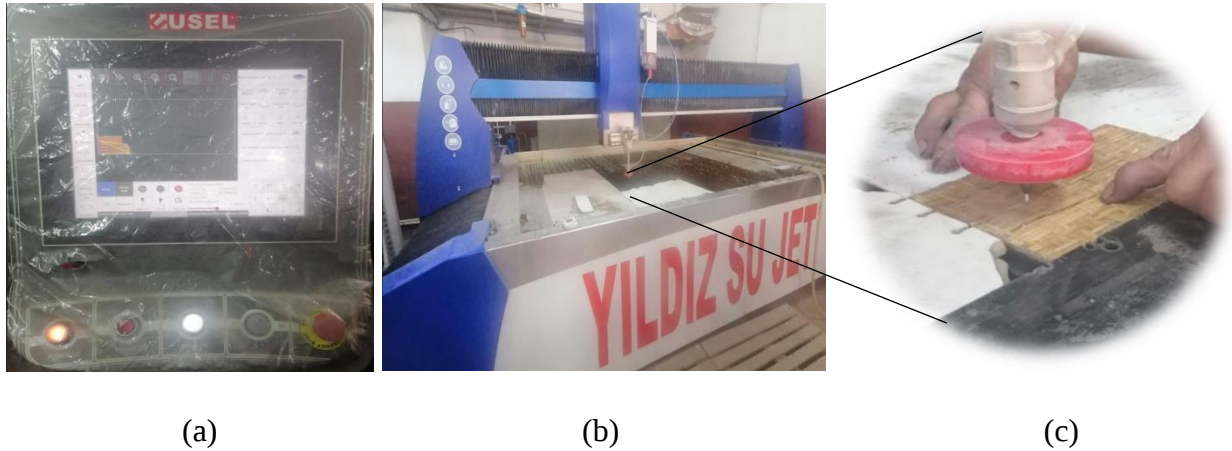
Sample cutting process: (a) Water jet machine, (b) design insertion and controlling section, (c) cutting process.
